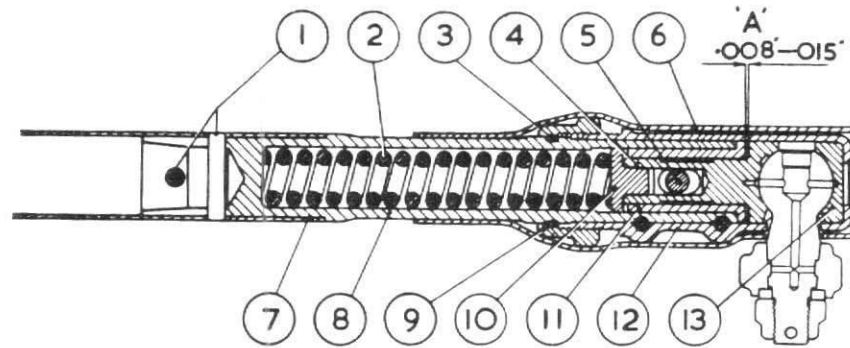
SECTION THROUGH CROSS STEERING TUBE JOINT.
